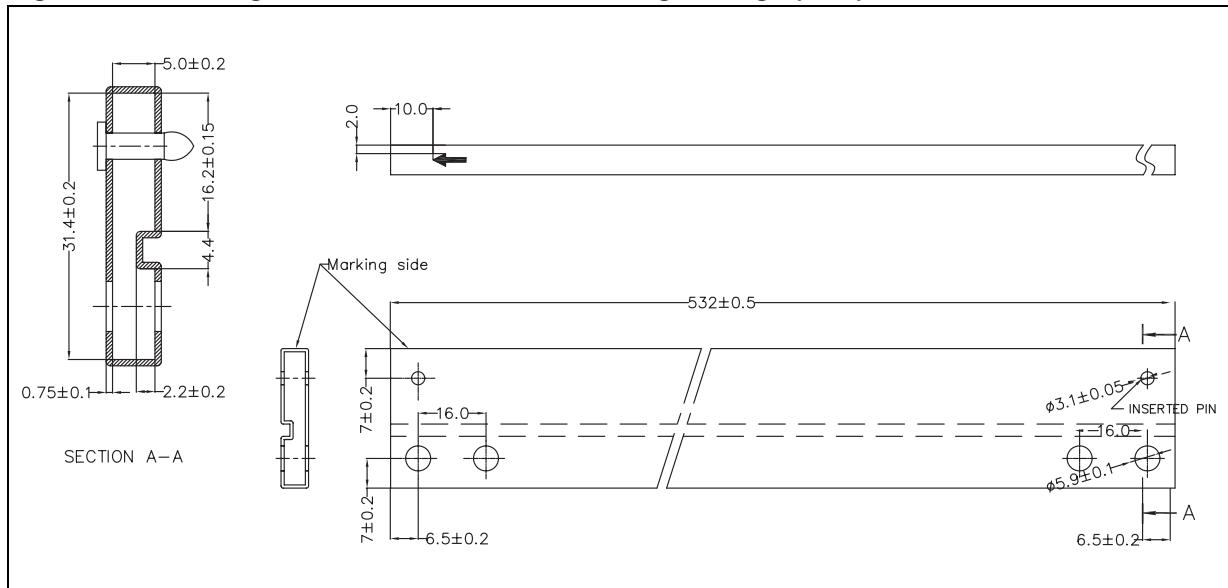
Drawing dimension TO-220 (type STD-ST Single Gauge)
